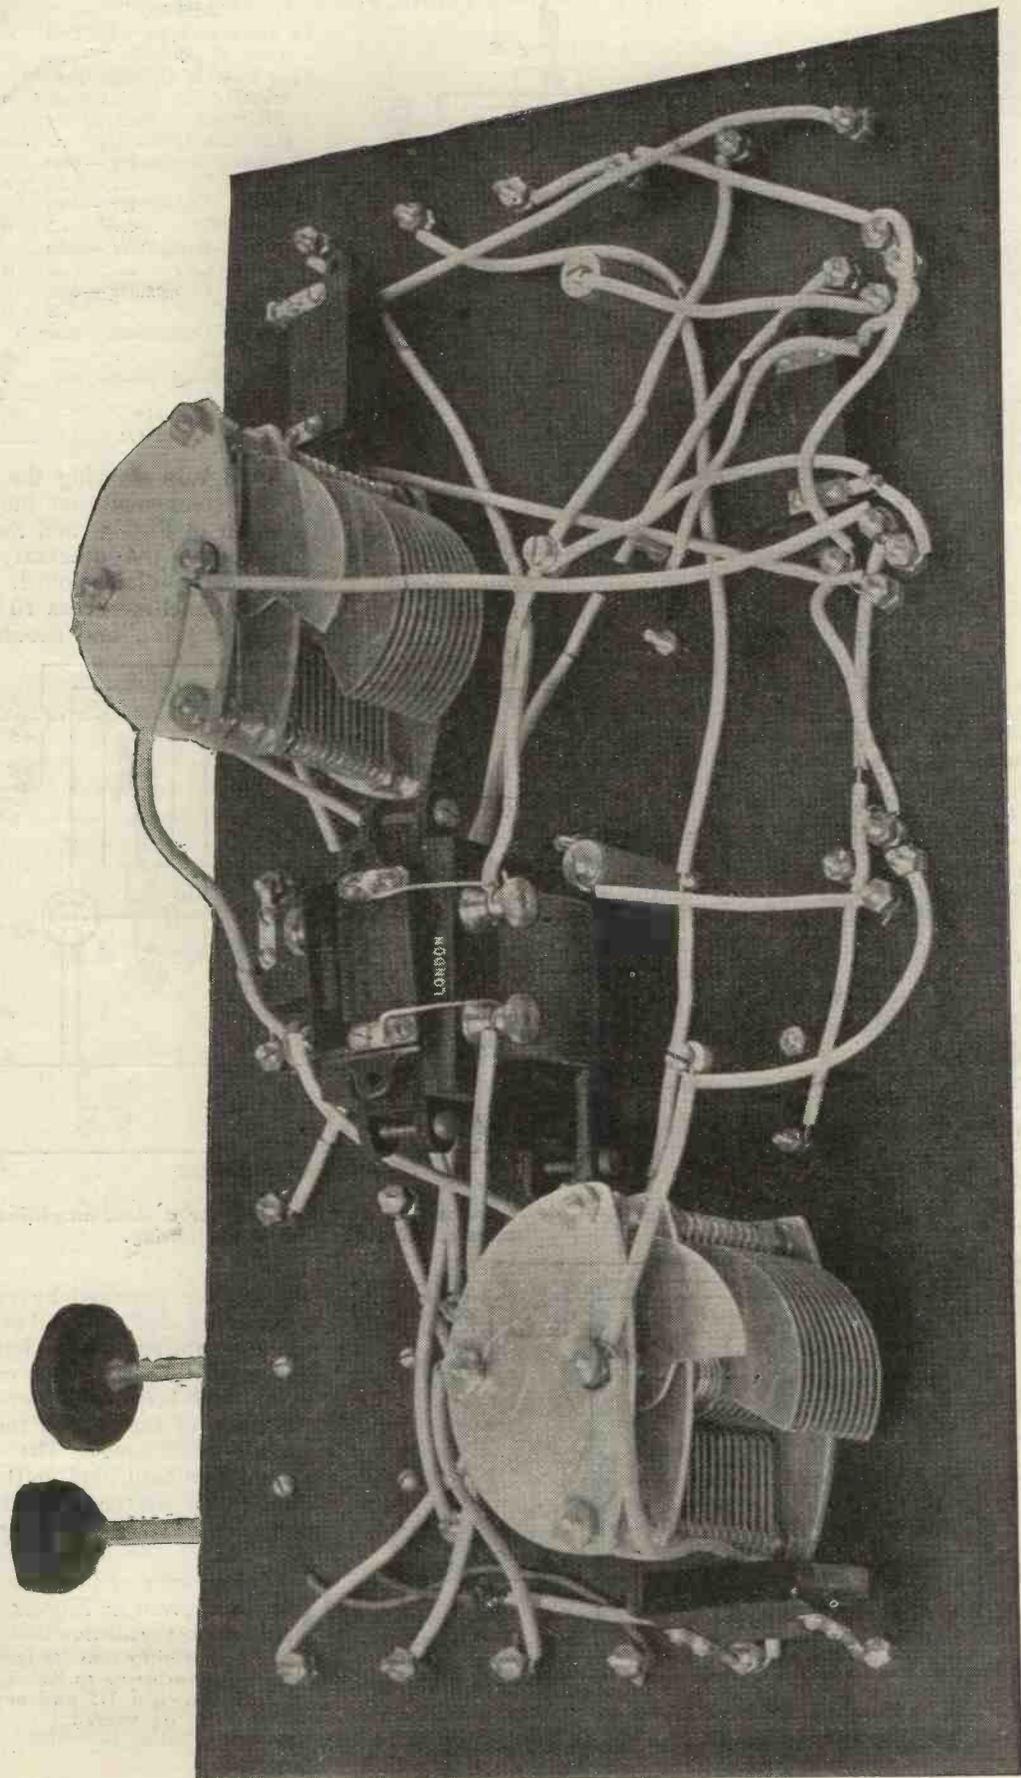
Another view of the back of the panel, showing more clearly the connections to the valve holders and transformer socket.
